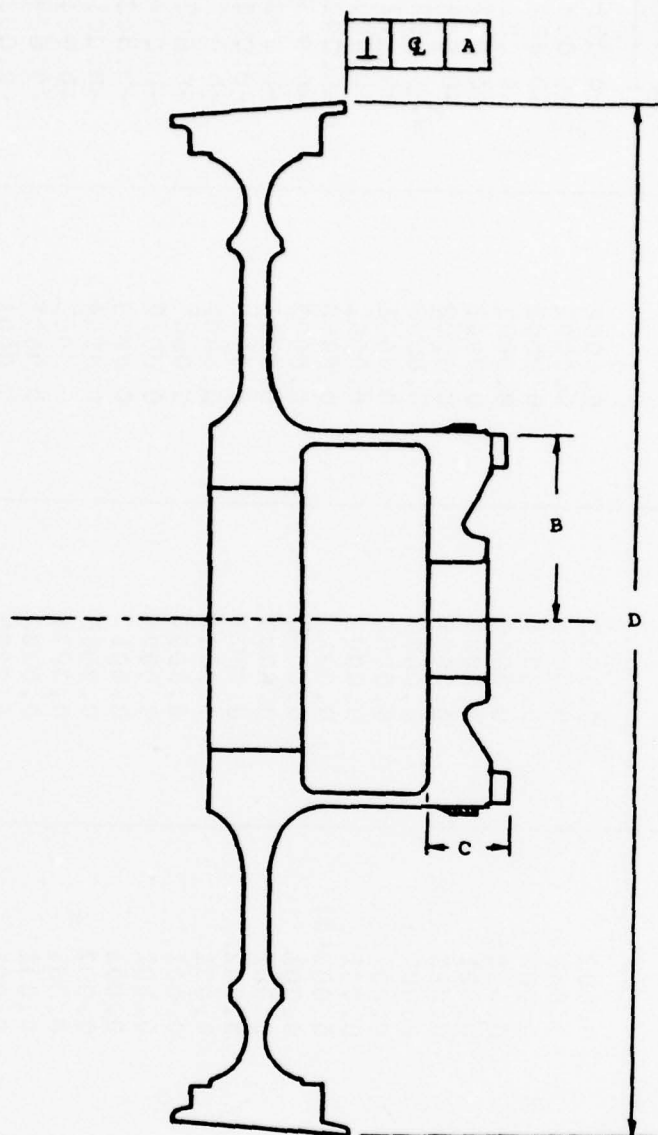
Location of Dimensional Measurements Taken On Field-Service Compressor Disks.
